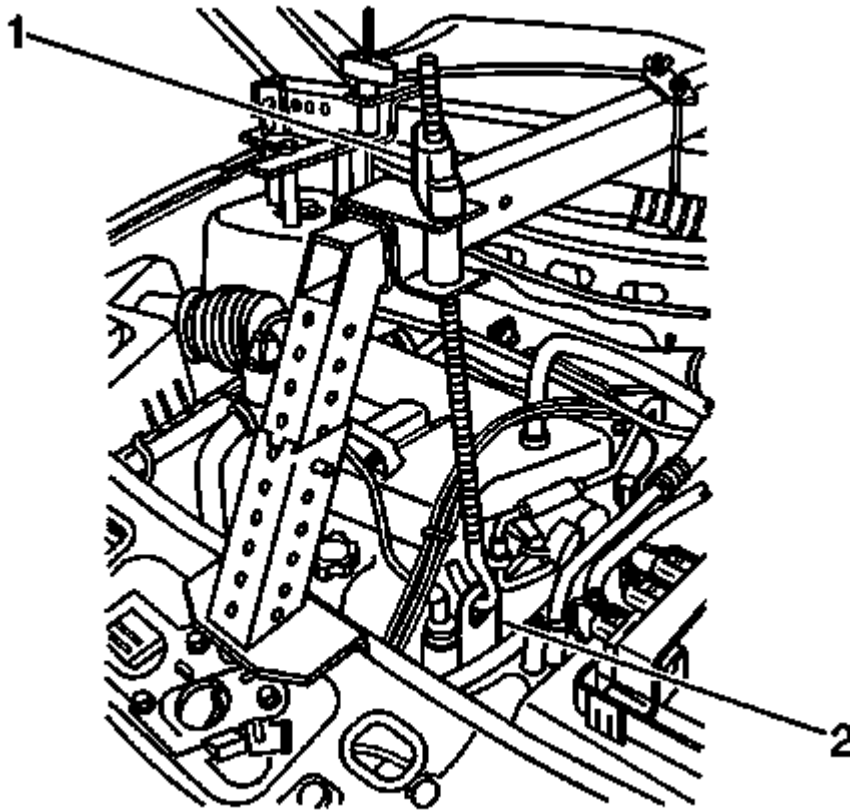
View Of J 28467-7A Lift Hook & Rear Engine Lift Bracket
